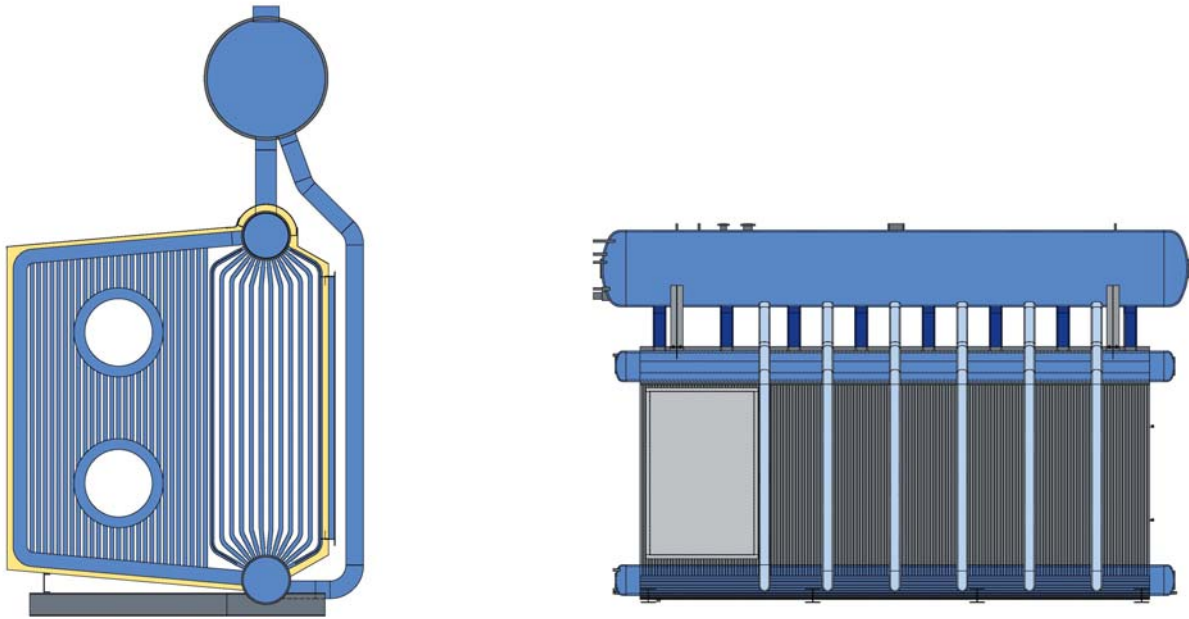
(Addendum) Front & side elevation views of Cleaver-Brooks Elevated Drum D-Type Boiler.
